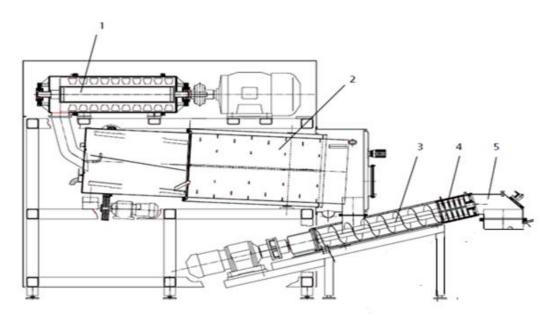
Line diagram of continuous butter making machine(CBMM)
